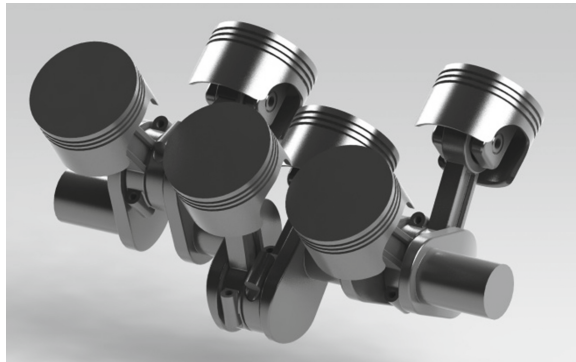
CAD model of the investigated system – crankshaft with six pistons of a V6 combustion engine
